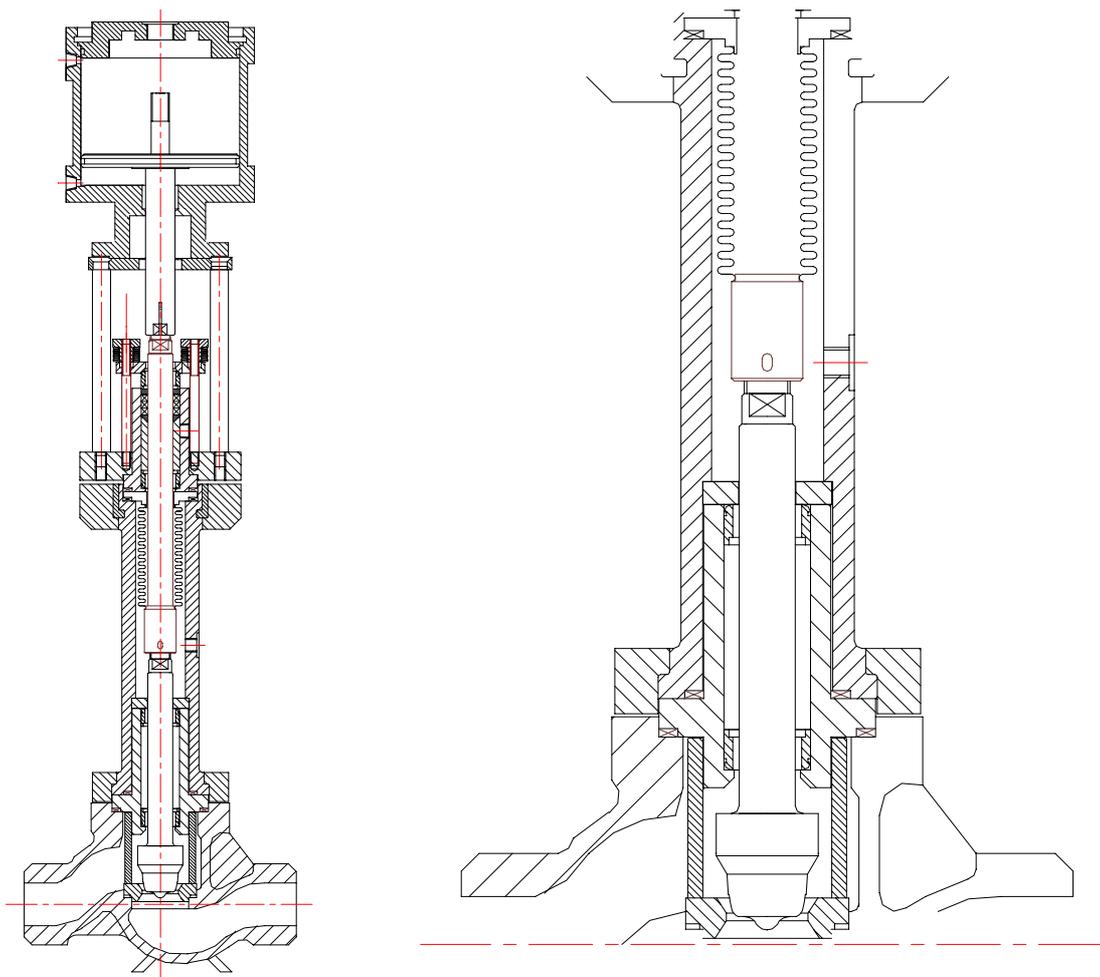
Drawing showing bellow seals, extended bonnet, grub screw and bonnet assembly plug
